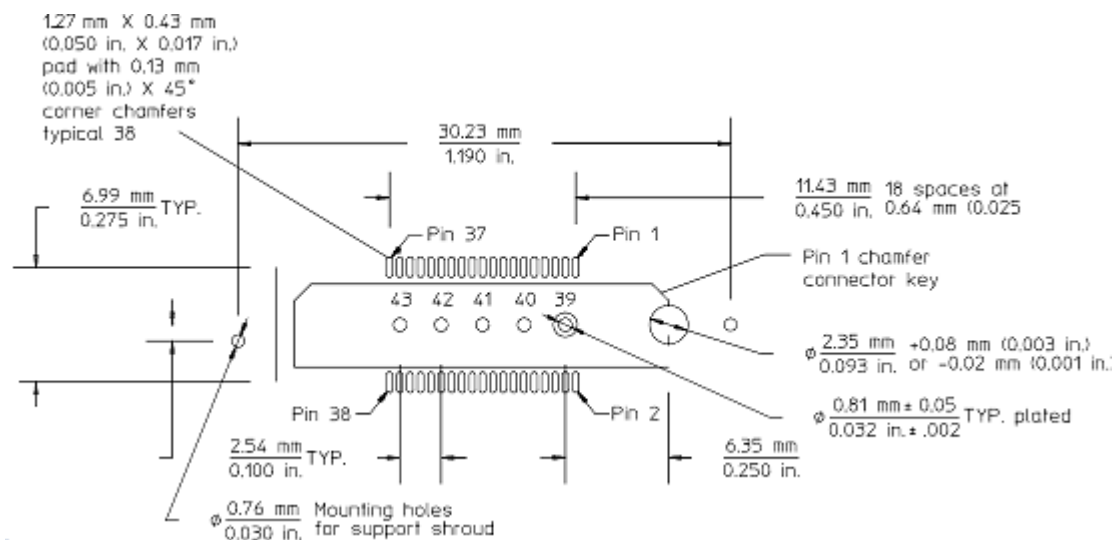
38-pin MICTOR connector footprint and support shroud mounting hole dimensions
